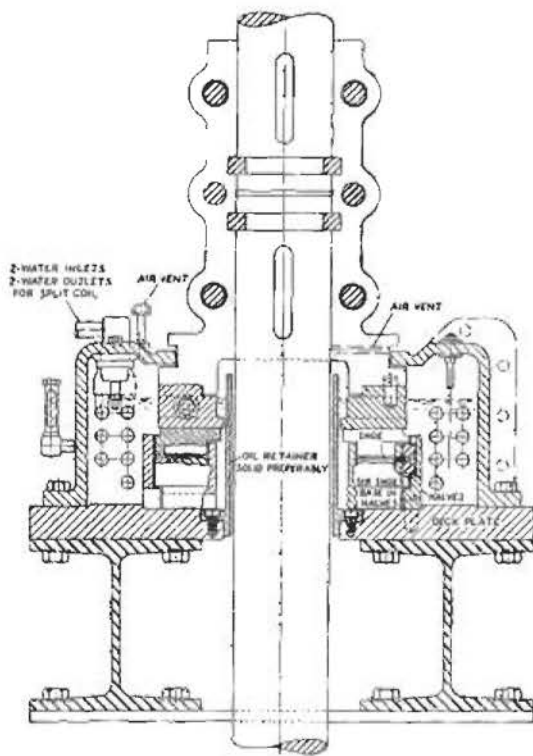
Full split thrust bearing and mounting designed for vertical shaft. Casing and coil are split. Deck plate and oil retainer should preferably be solid. Note use of separate shoe-retaining ring with Style J or B thrust bearing. This can be used in other mountings also, in preference to a cored vertical flange integral with the thrust deck as in Figure 14.
